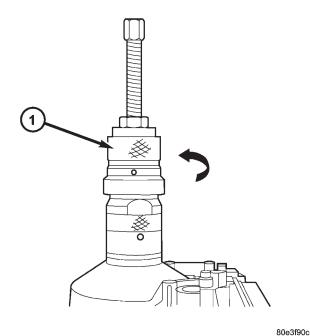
Assemble Special Tool To Remove Output Shaft Rear Bearing
